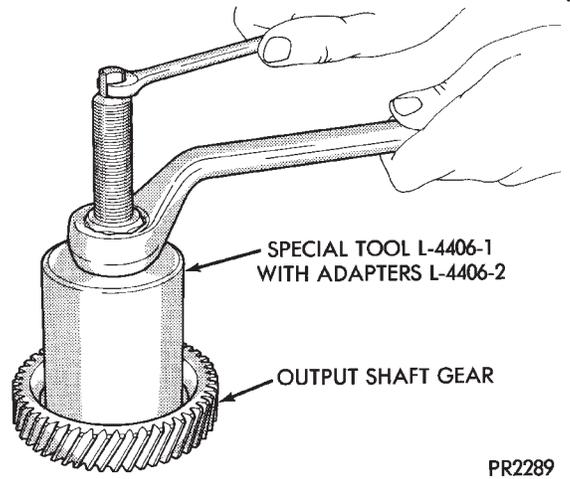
Remove Output Shaft Retaining Nut and Washer
